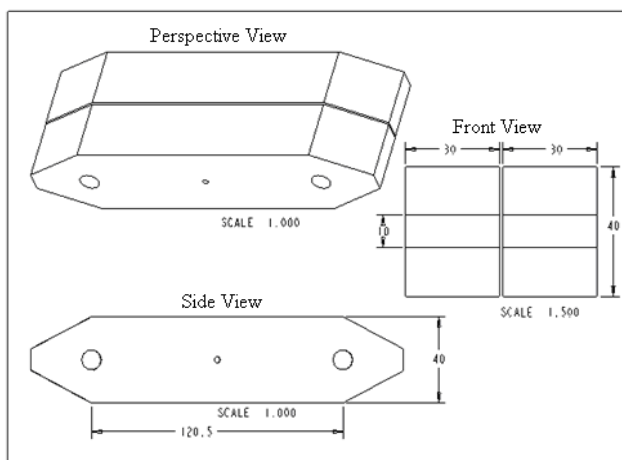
SKETCH OF SPECIMEN FOR ROLLING (mm)
